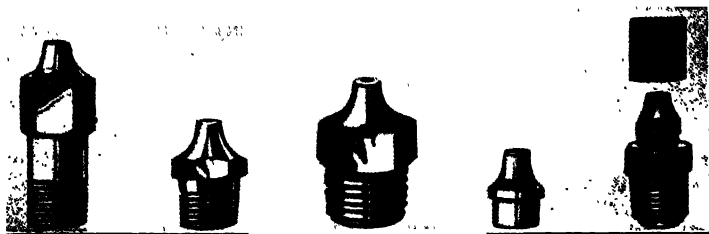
Straight fittings for Alemite-Zerk compressor.
